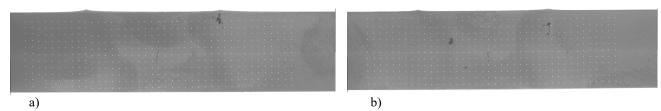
The view of FSW welded specimens after hardness testing with visible measurement points: a) welded by cylindrical tool, b) welded by conical tool
